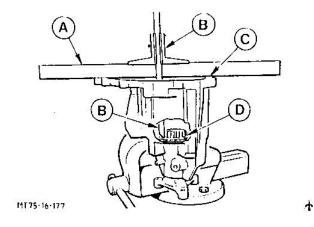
Measure end float (distance from mating face of transfer box to bearing inner race shown in partially scrap side view).
